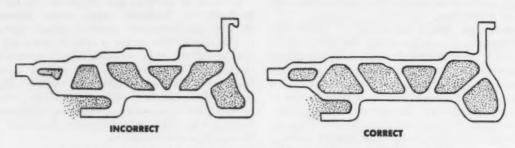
Inner wall sections of complex cored castings should be of uniform thickness, but proportionately thinner than the outer walls, which cool faster.
